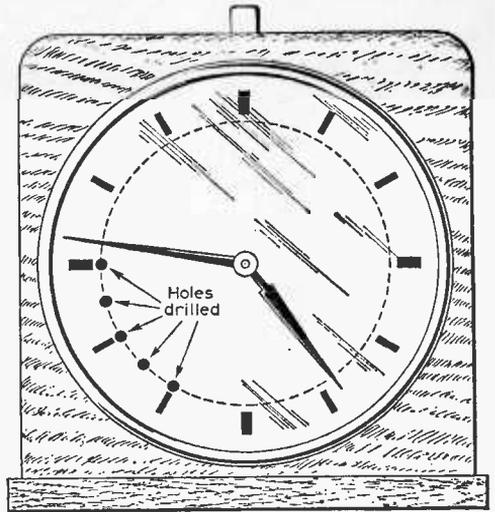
The inner dotted circle indicates the line to be followed when drilling holes for inserting the end of the insulated lead.
